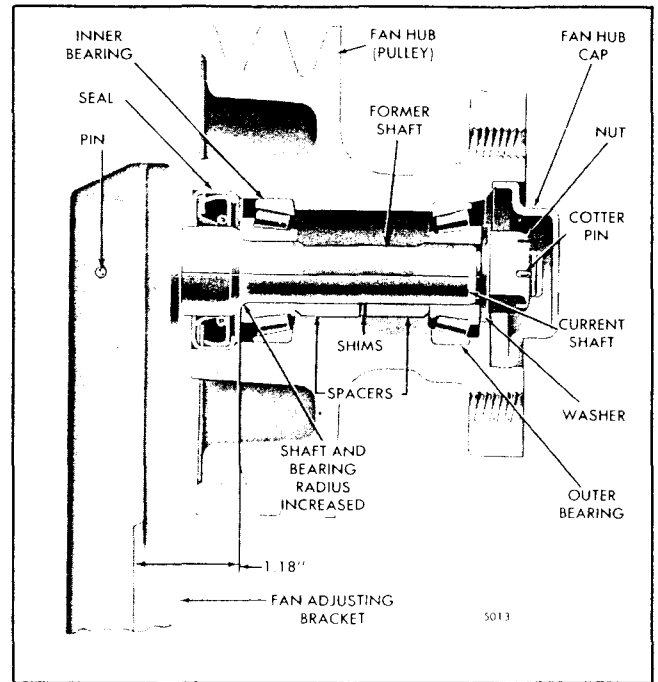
Shaft Type Fan Hub Assembly (6V Engine)
